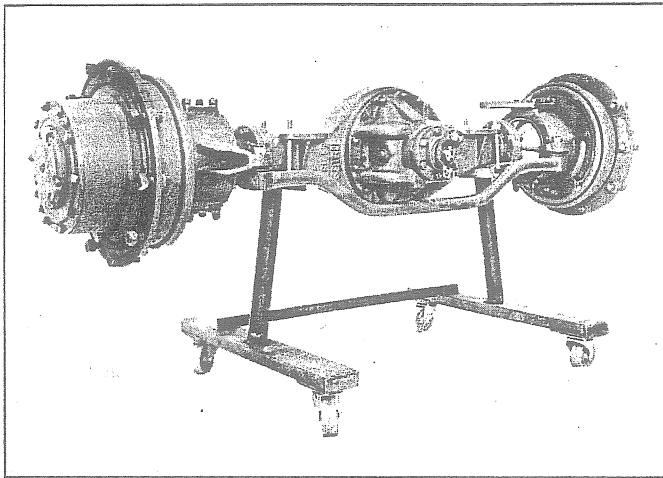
Front Drive Steer Axle Mounted on a Stand
